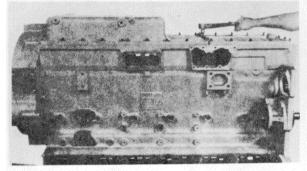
N-51. Tighten the Oil Pan Capscrews PISTON COOLING NOZZLES
